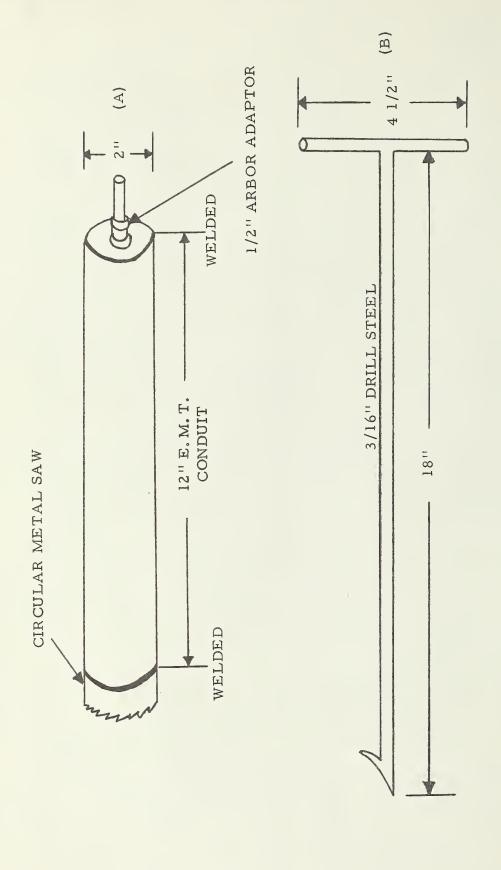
Sketch of the sampling device showing cutting tool (A) and core remover (B).
